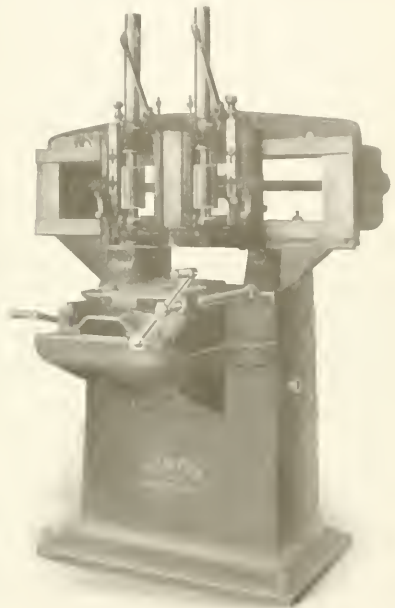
Machine shown in Fig. 1 equipped with Individual Motor Drive
